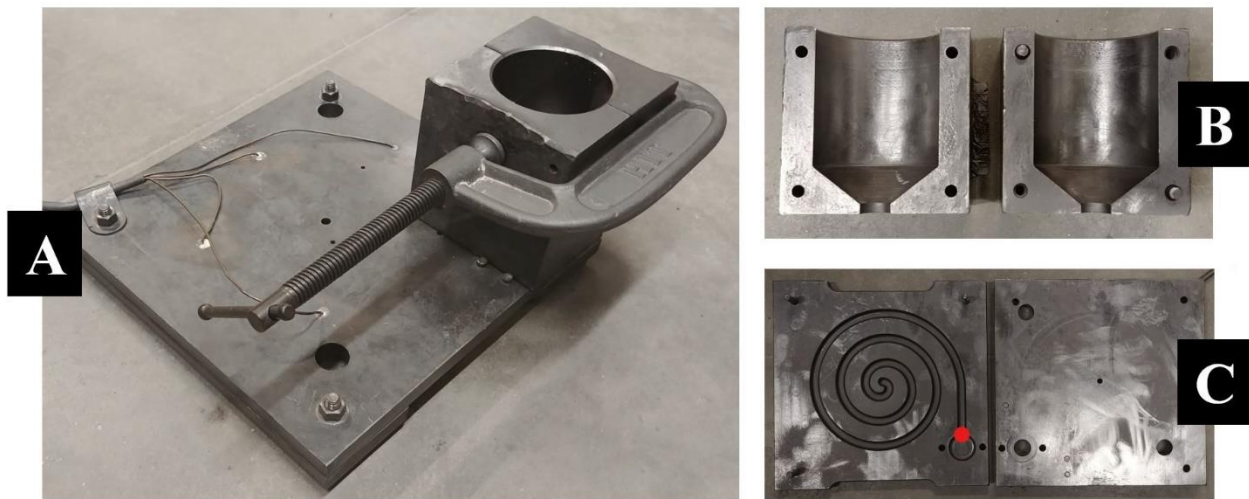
Fluidity mold; (a) assembly, (b) open down sprue, (c) open cope and drag
